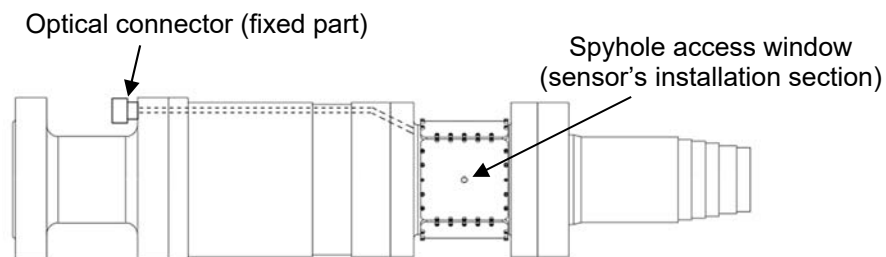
Schematic drawing of MODA basic components for Spyhole end fitting.
